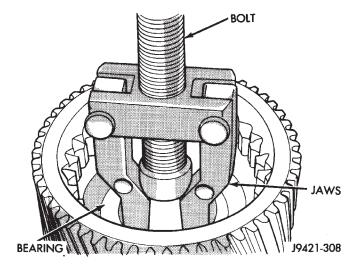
Puller Bolt And Jaws Seated Under Pilot Bearing
